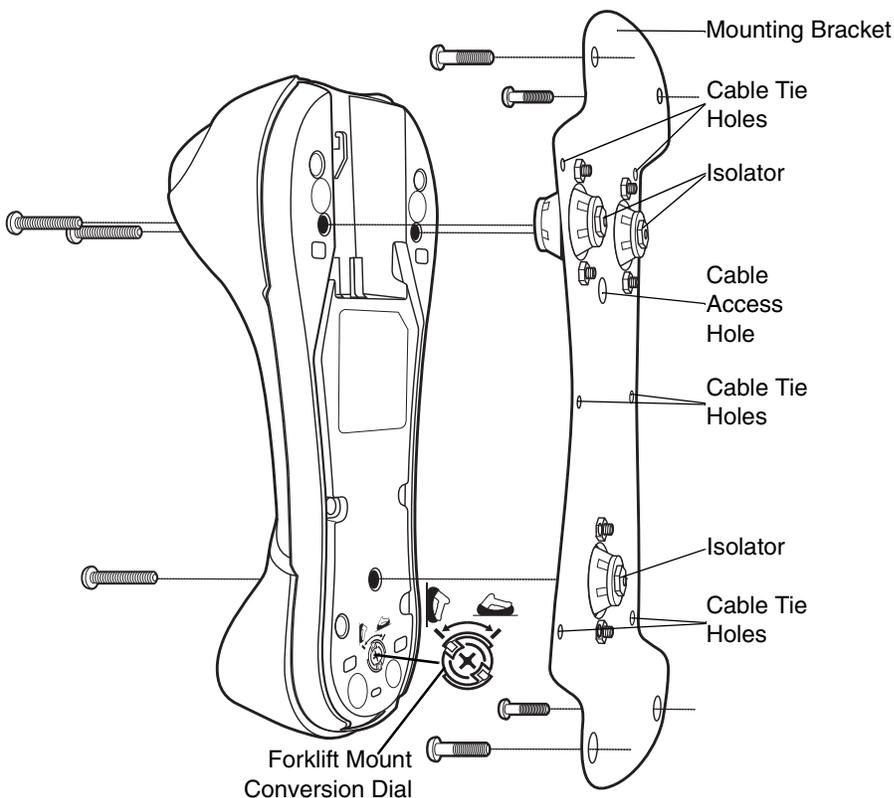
Attaching Forklift Mounting Bracket to Cradle
